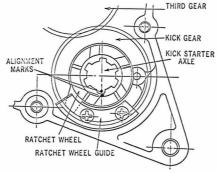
When assembling YA-6 kickstarter, align marks on axle and ratchet wheel as shown.
